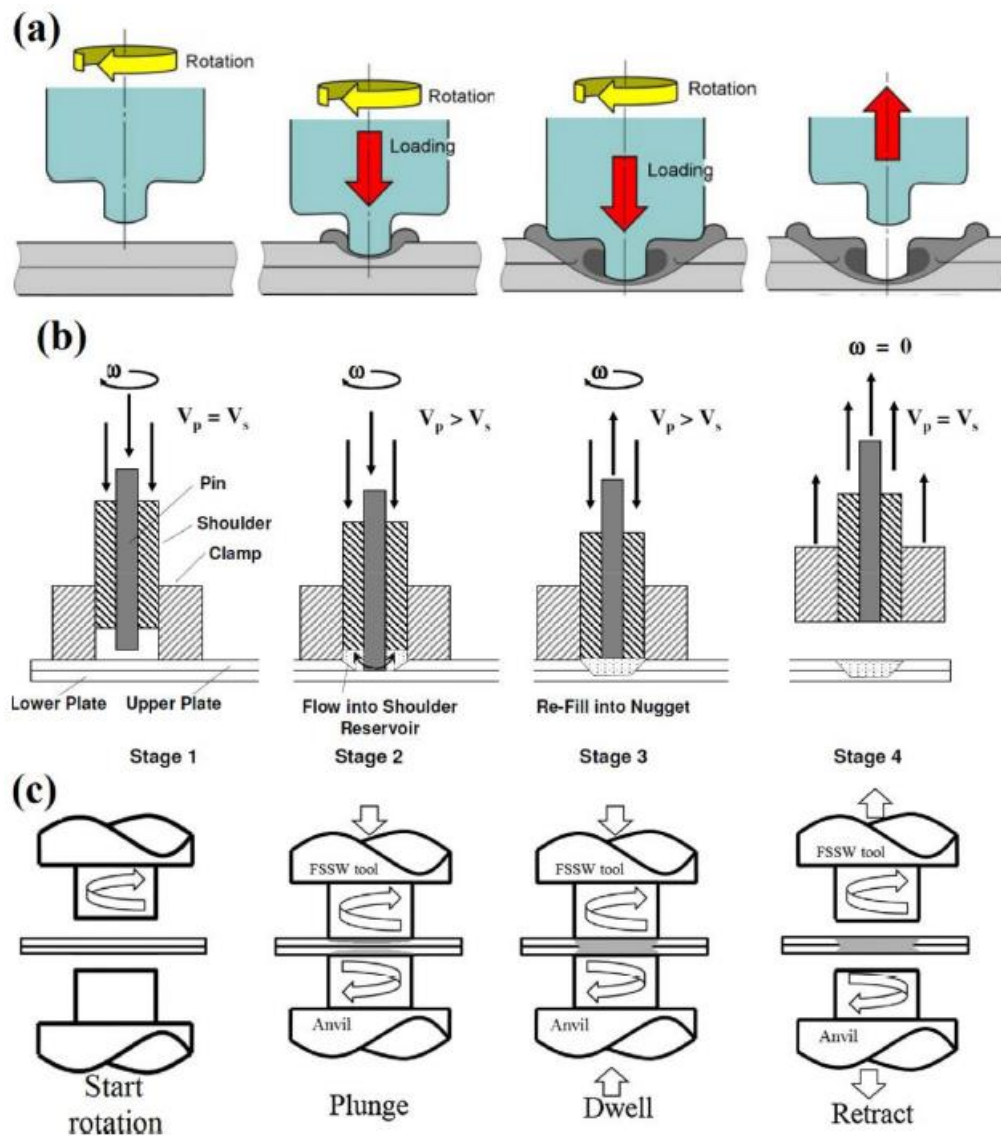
Diagrams of (a) “Friction Stir Spot Welding (FSSW)”, (b) “Refill Friction Stir Spot Welding” [13], and (c) “Double-Sided FSSW”.
